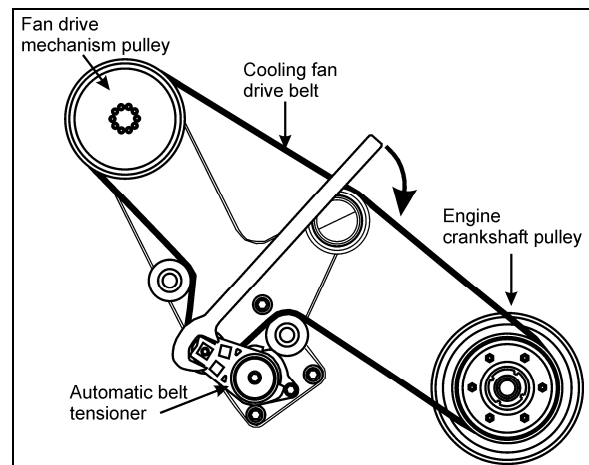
DRIVE BELT ROUTING (VOLVO D13 ENGINE)
